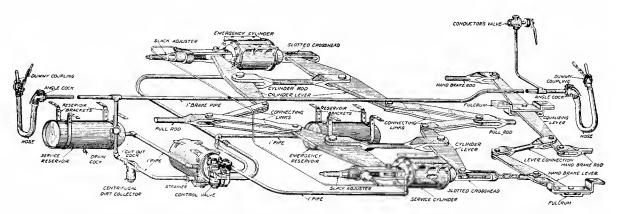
P C Passenger Brake Equipment with Cylinders Pointing in the Same Direction.
